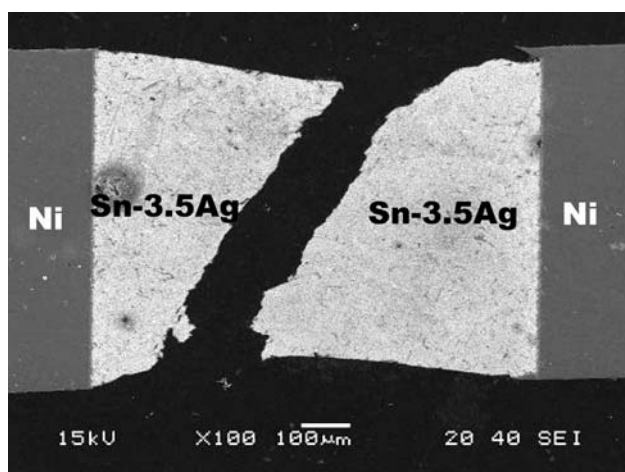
Fracture in the Ni/Sn-3.5Ag/Ni sample aged at 160°C for 100 h without current, showing ductile failure inside the bulk solder.
